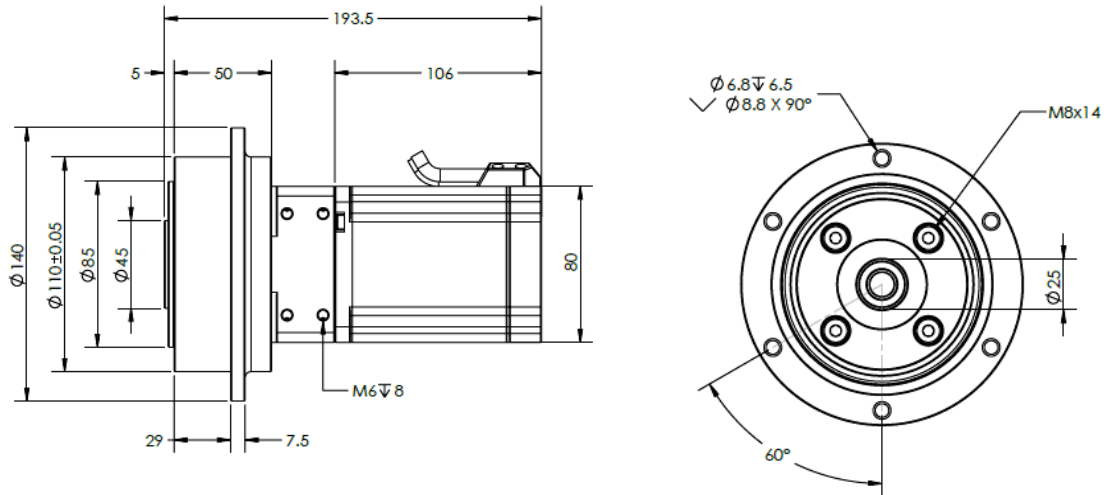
Dimensions – gearmotor GM-010100 / GM-010200
